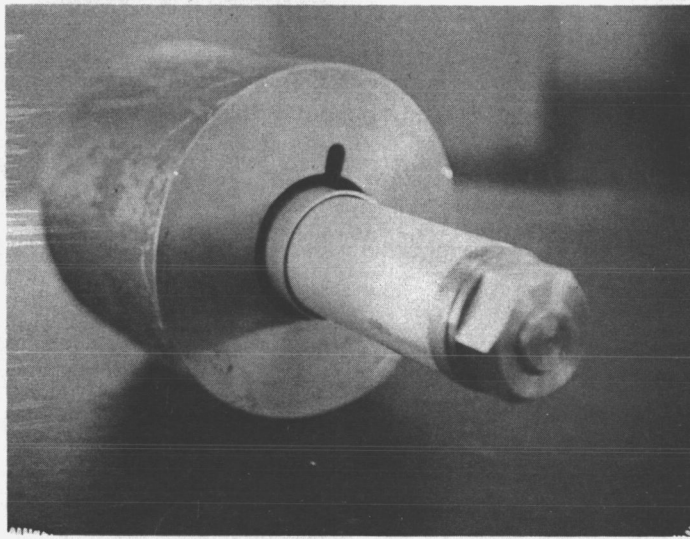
Straight Sleeve Joint Mounted in Protective Cover (Note that the Mandrel Keeps the Tubes in Place and Prevents Collapsing).
